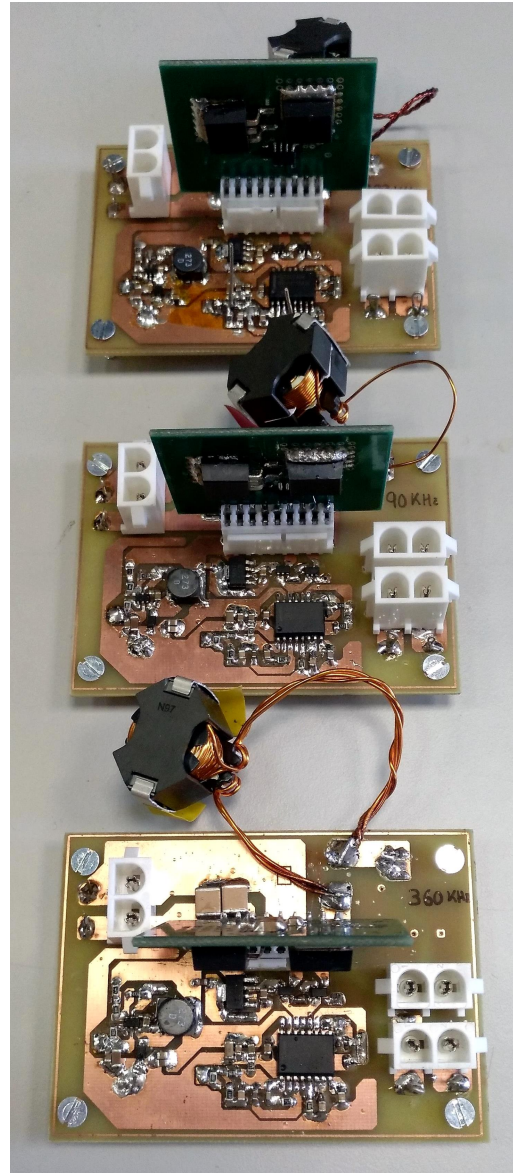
Prototypes of the three synchronous buck converter designs. From top to bottom: Optimum Design, Design 1 and Design 2.
